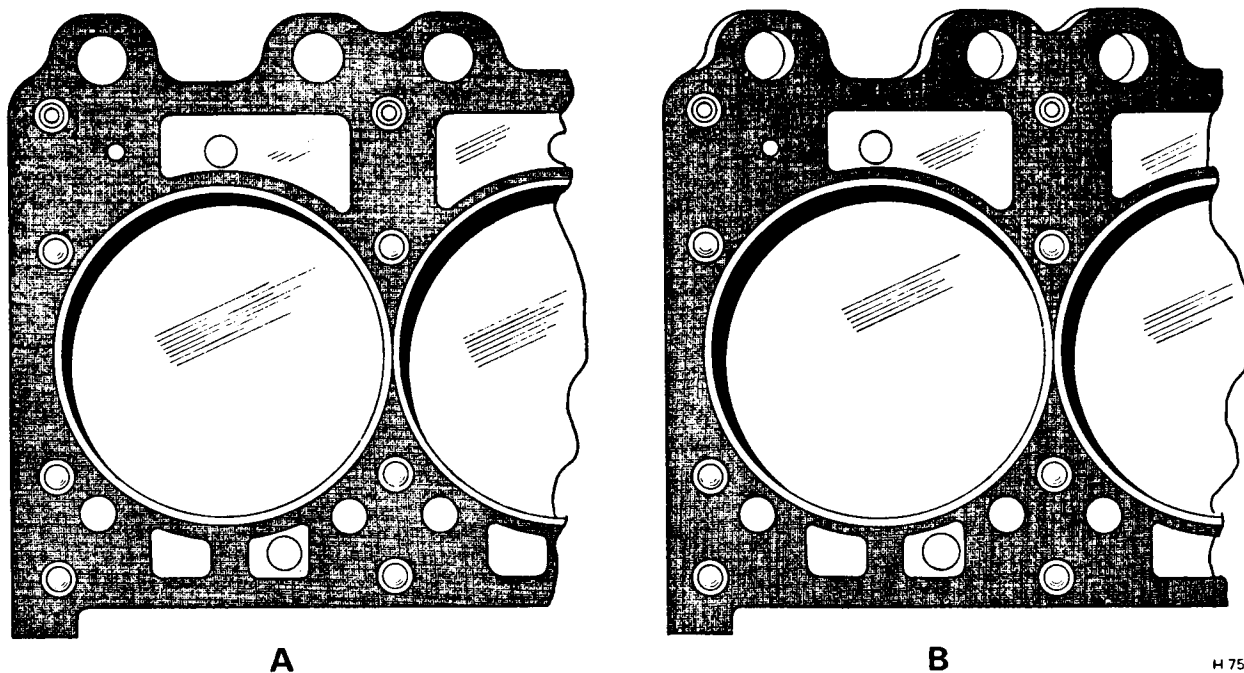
POSITIONING THE CYLINDER HEAD GASKET (Early Cars)
